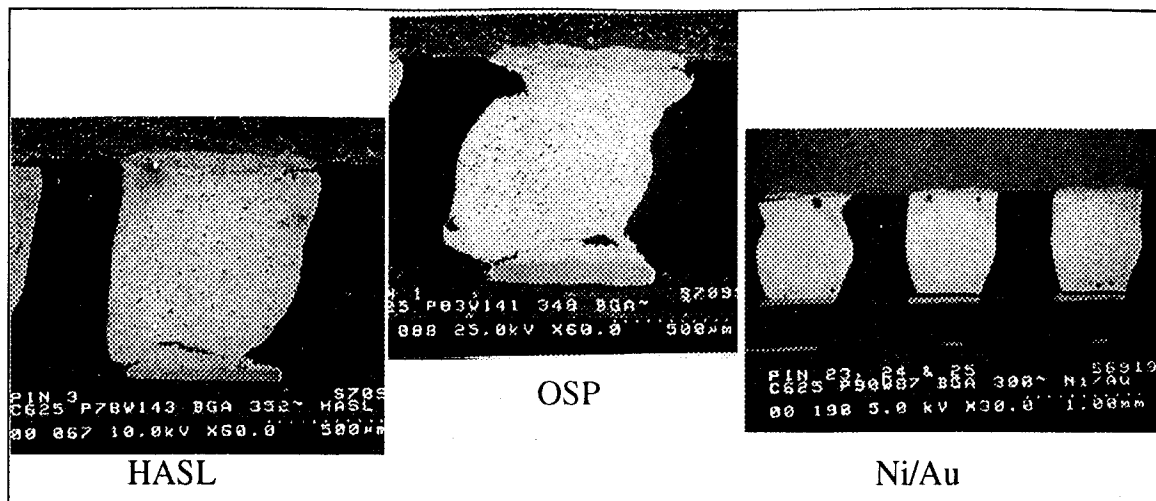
Failure Mechanisms for Joints on OSP, HASL, and Ni/Au Surface Finishes for CBGA 625 under A Conditions (-30°C to 100°C)
